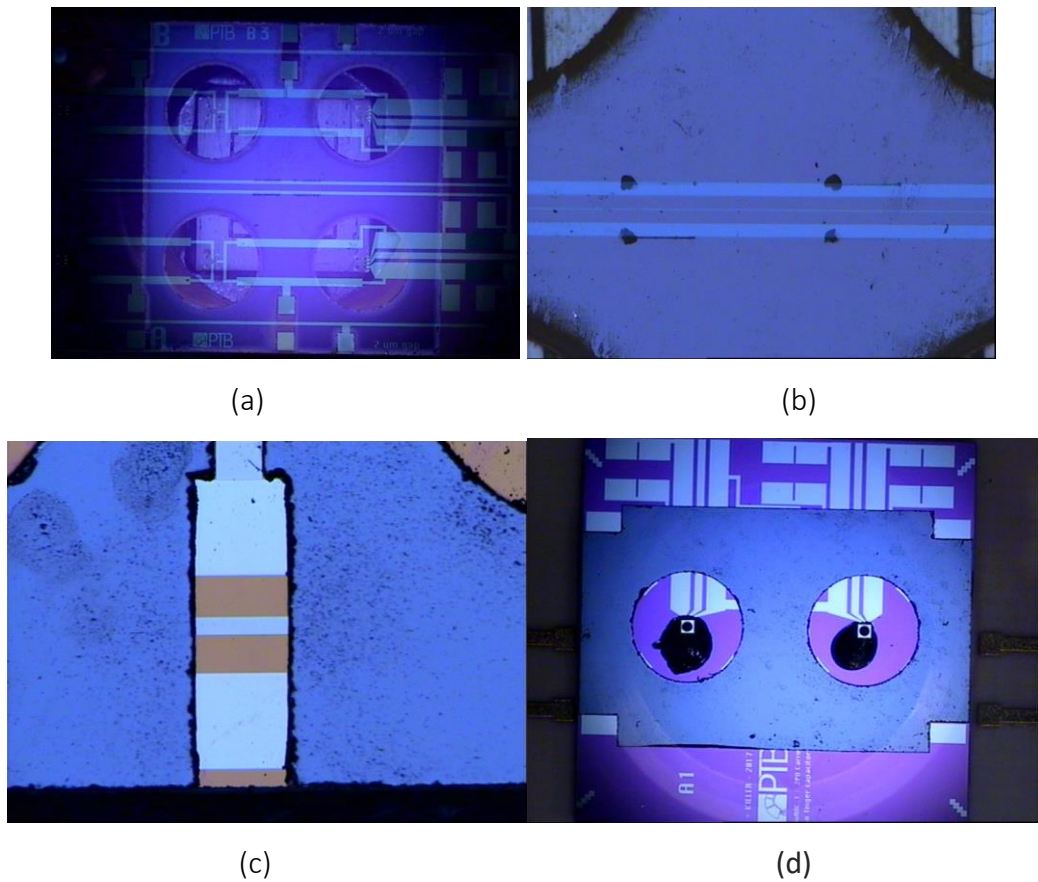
Assembly of silicon fixtures for mounting of alignment sleeves. (a) Overlaid images of bonding surfaces. (b) Close-up of laser cut lines used for alignment to Nb conductive lines. (c) Close-up of silicon fixtures aligned to bonding pads. (d) Image of two-photodiode silicon fixture with flip-chip mounted photodiodes.
